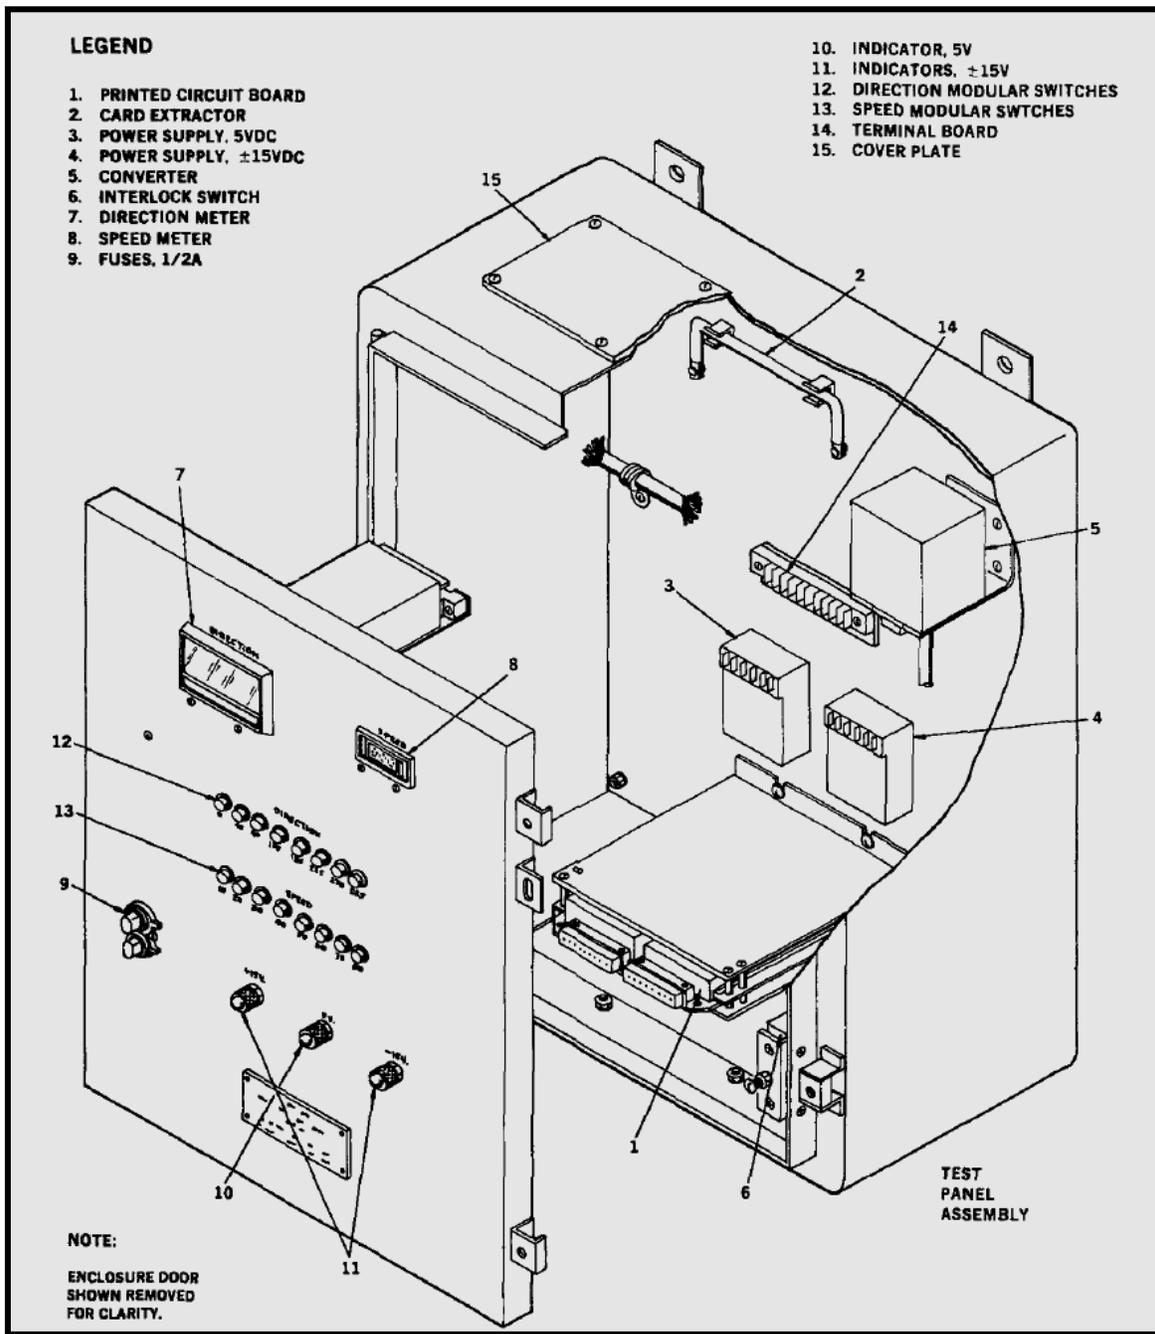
Dual Station BITE Test Panel Assembly and Synchro Panel Assembly. (Sheet 1 of 2).
